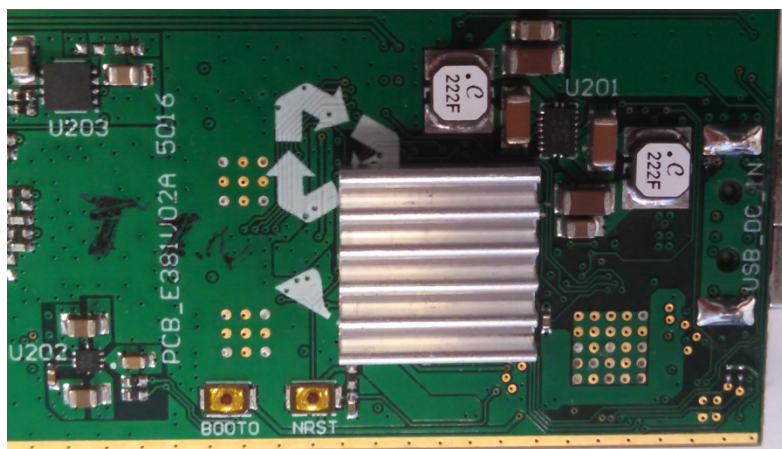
Heat Sink on Top and Bottom of SX1308 – Bottom View
